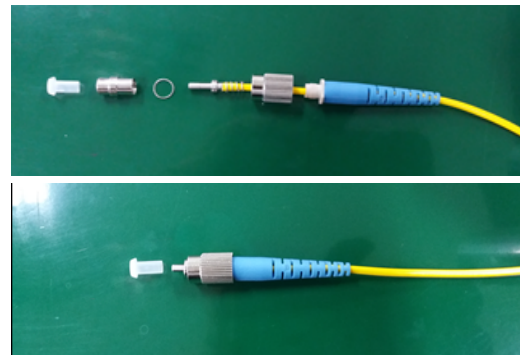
Assembly of a ferrule with the other components for a patch cord
